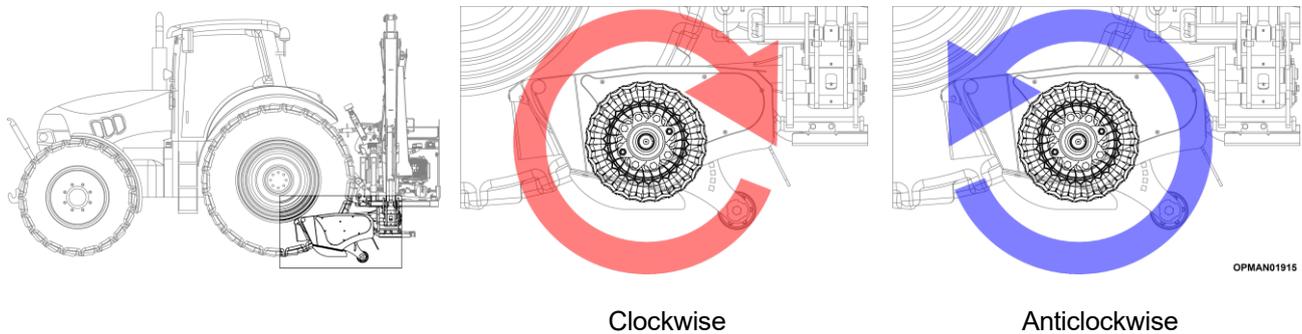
Attachment Rotor Shaft Rotation Definitions
